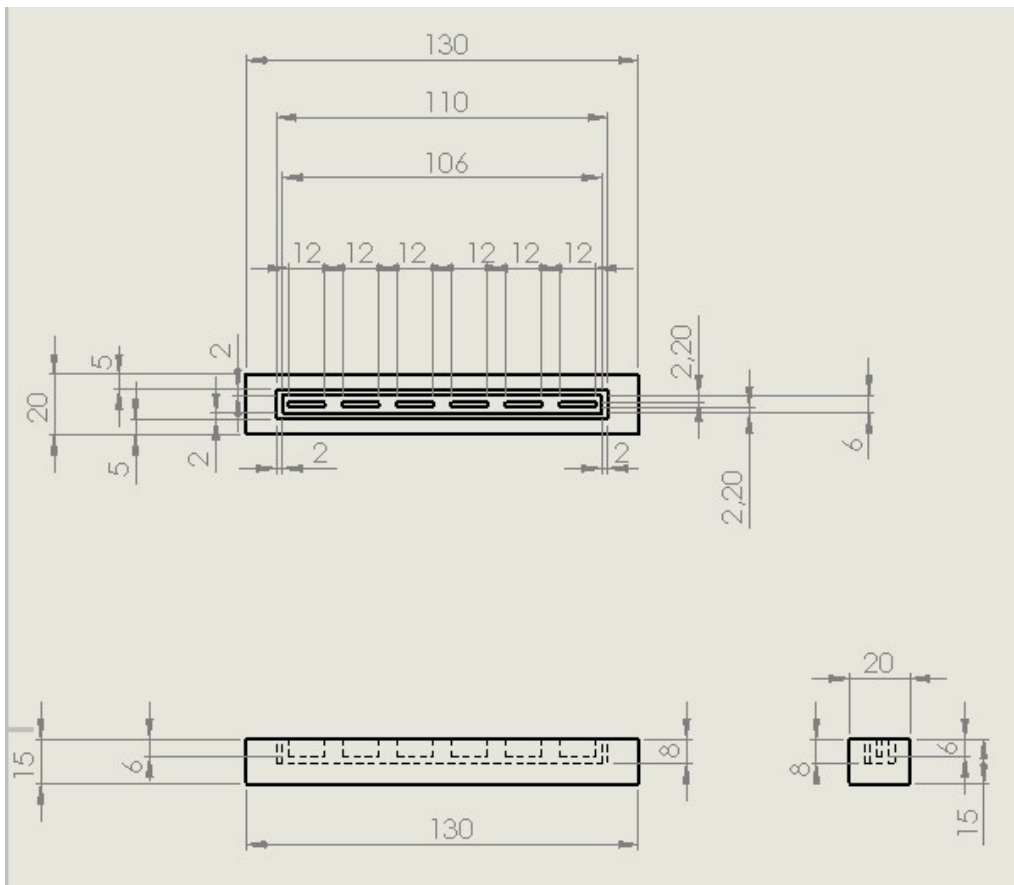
Technical drawing of the internal support of e-nose v2 and v3.
